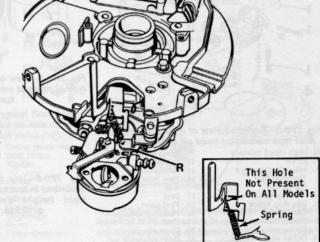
View showing location of vent hole on TVS type fixed main jet carburetor.
